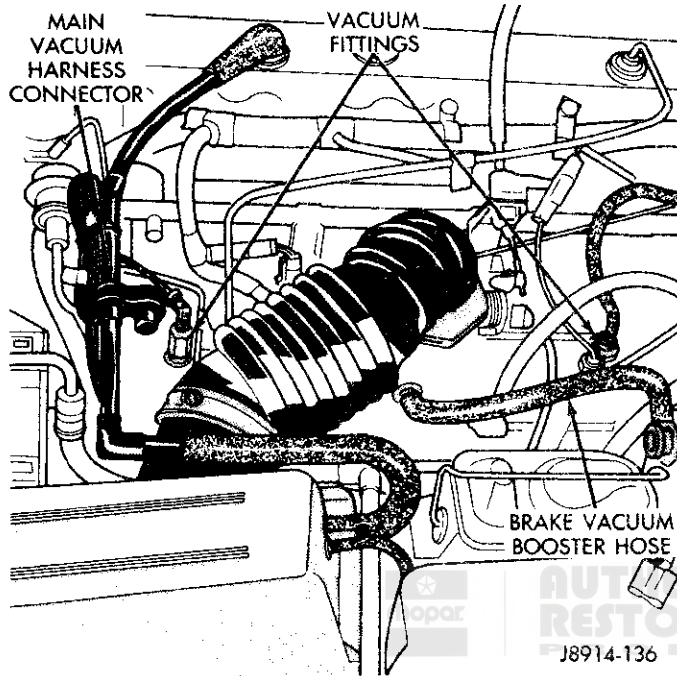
Main Vacuum Harness, Intake Manifold Vacuum Fittings, Brake Vacuum Booster Hose
